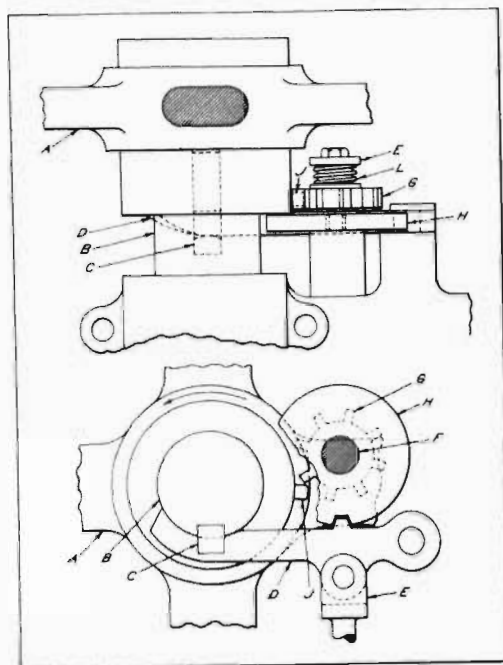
Mechanism employed on a punch press to disengage the clutch automatically after eight strokes of the ram.
